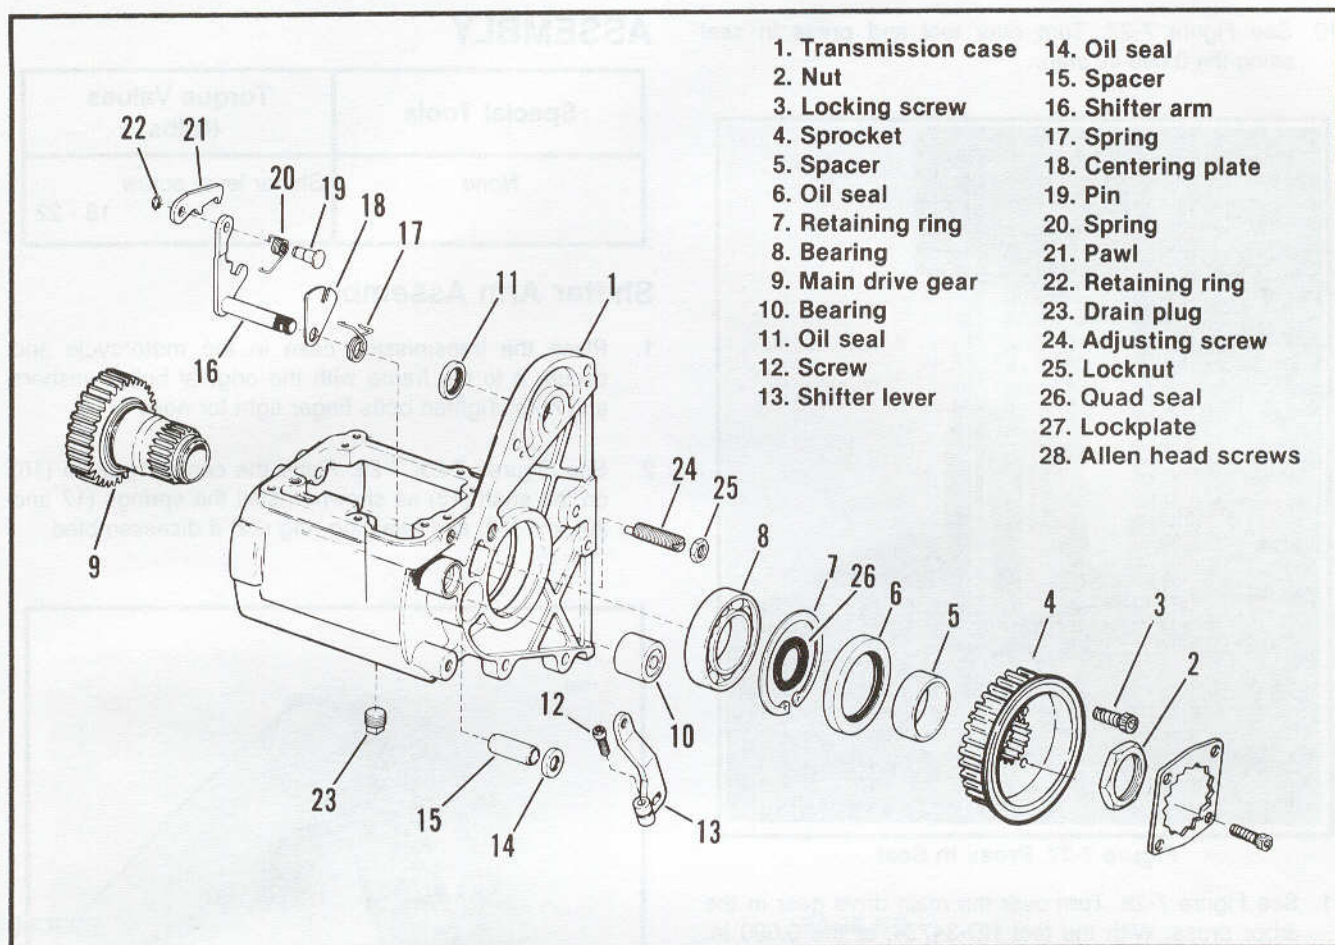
Transmission Case, Sprocket and Main Drive Gear
